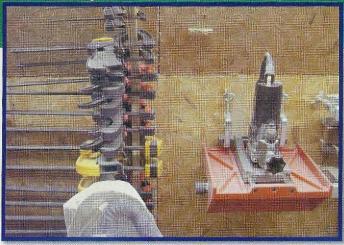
Clamps and Hegner finger joint machine hung where box filter was.
